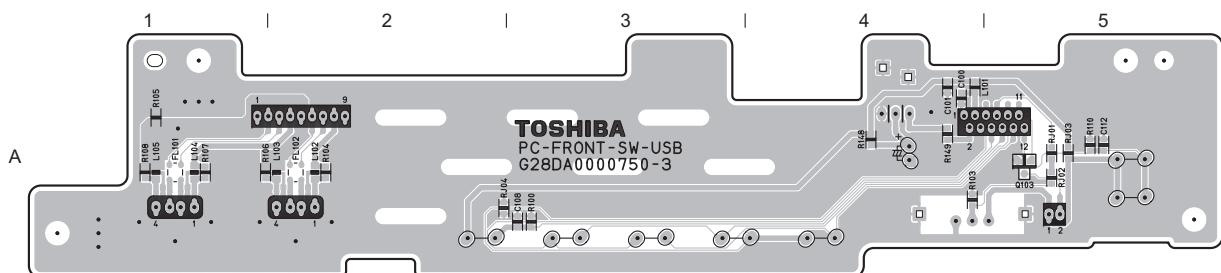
Front Switch/USB PC Board (Bottom side)
